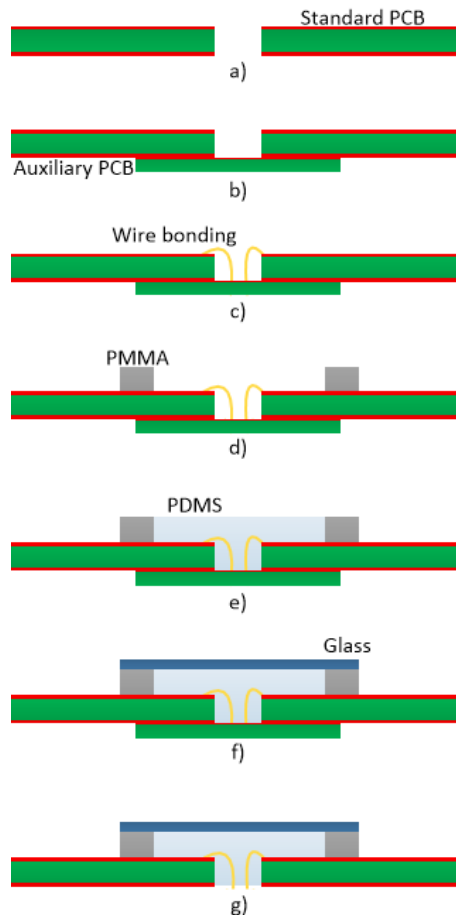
Steps of the fabrication process, using the wire bonding technique: a) Commercial PCB of FR4 and copper; b) A auxiliary PCB is bonded to the commercial PCB; c) Gold microelectrodes with a diameter of $25\ \mu\text{m}$ are placed using the wire bonding technique; d) A frame of PMMA surrounds the gold microelectrodes; e) The gold microelectrodes cavity is filled with PDMS, embedding them; f) A glass coverslip is placed over the PDMS; g) Once the PDMS is cured, the auxiliary PCB is released.
